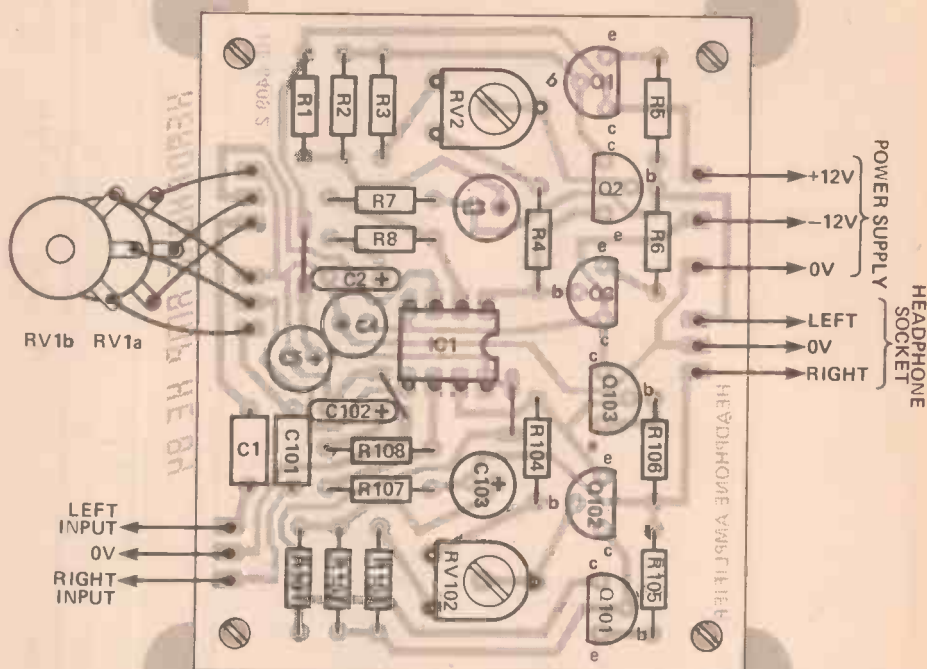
The PCB layout. Make sure that the pots are securely soldered.
